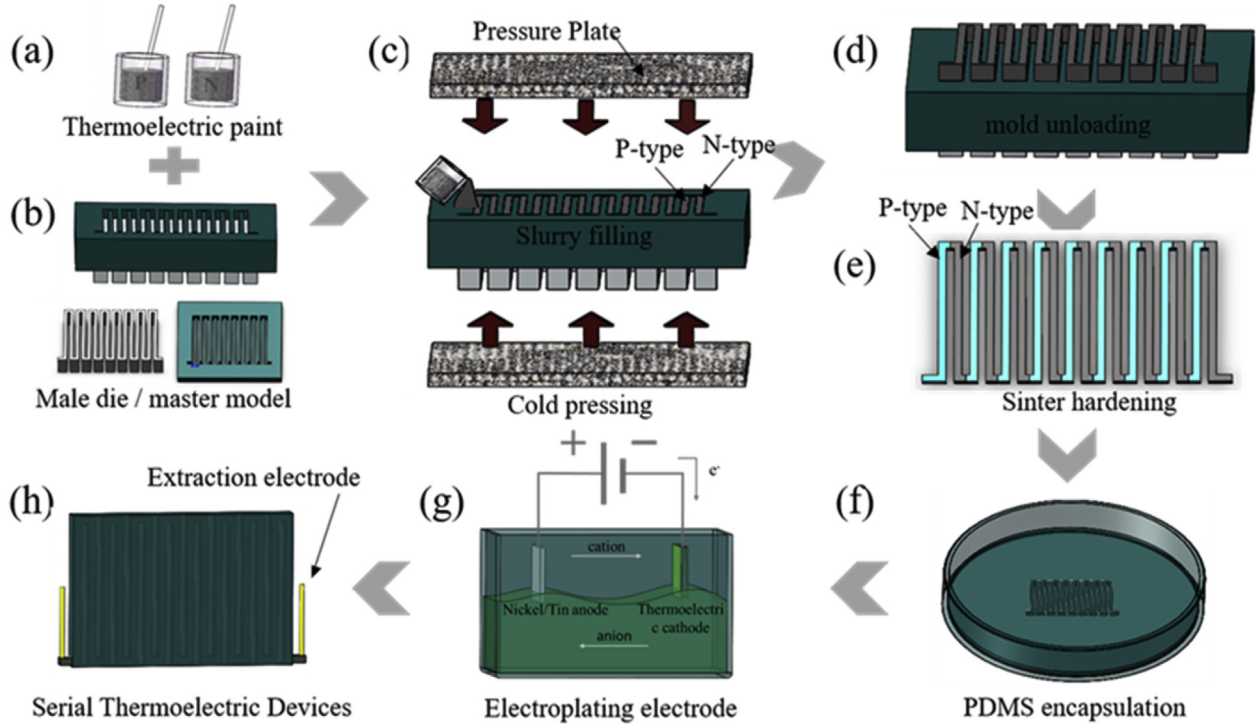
Fabrication of thermoelectric devices based on cold-press sintering and molding method.
